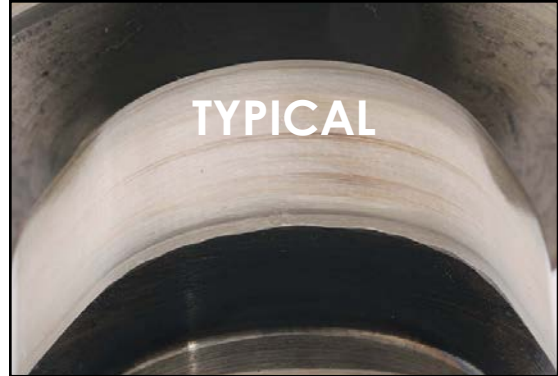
Cam Shaft Lobe Inspection After 100,000 Miles of Service
